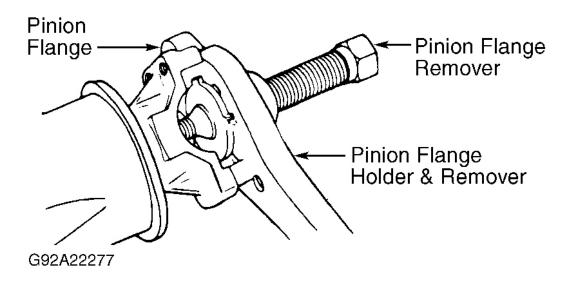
Removing Pinion Flange Courtesy of GENERAL MOTORS CORP.
